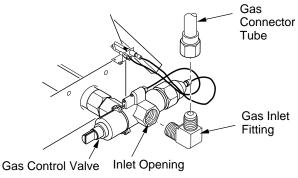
Installing Inlet Fitting and Gas Connector Tube
